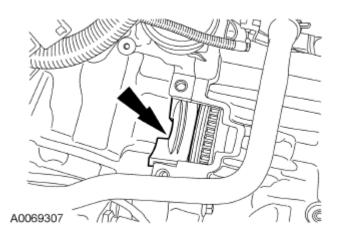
Locating Starter Stud Bolts Courtesy of FORD MOTOR CO.
